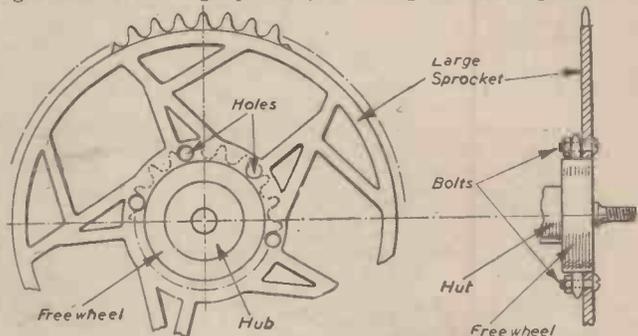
Showing how the large sprocket wheel is bolted to the off-side free-wheel.
